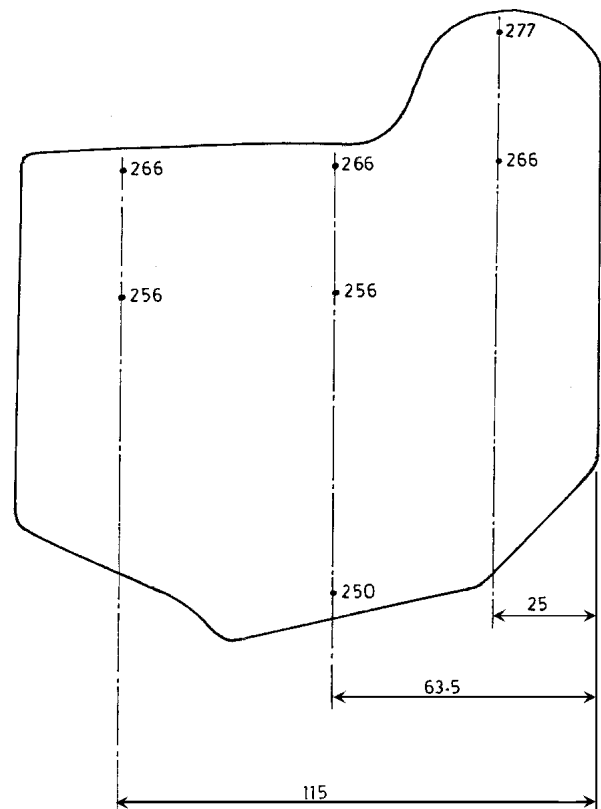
Hardness profile in BHN of a normalized wheel section of micro alloyed steel A, showing all dimensions in millimeters (Heat No. 973/9220, Wheel No. 5162)
